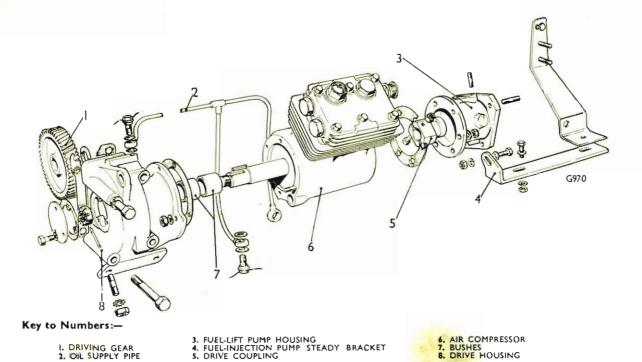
Exploded view of compressor and fuel-injection pump drive
